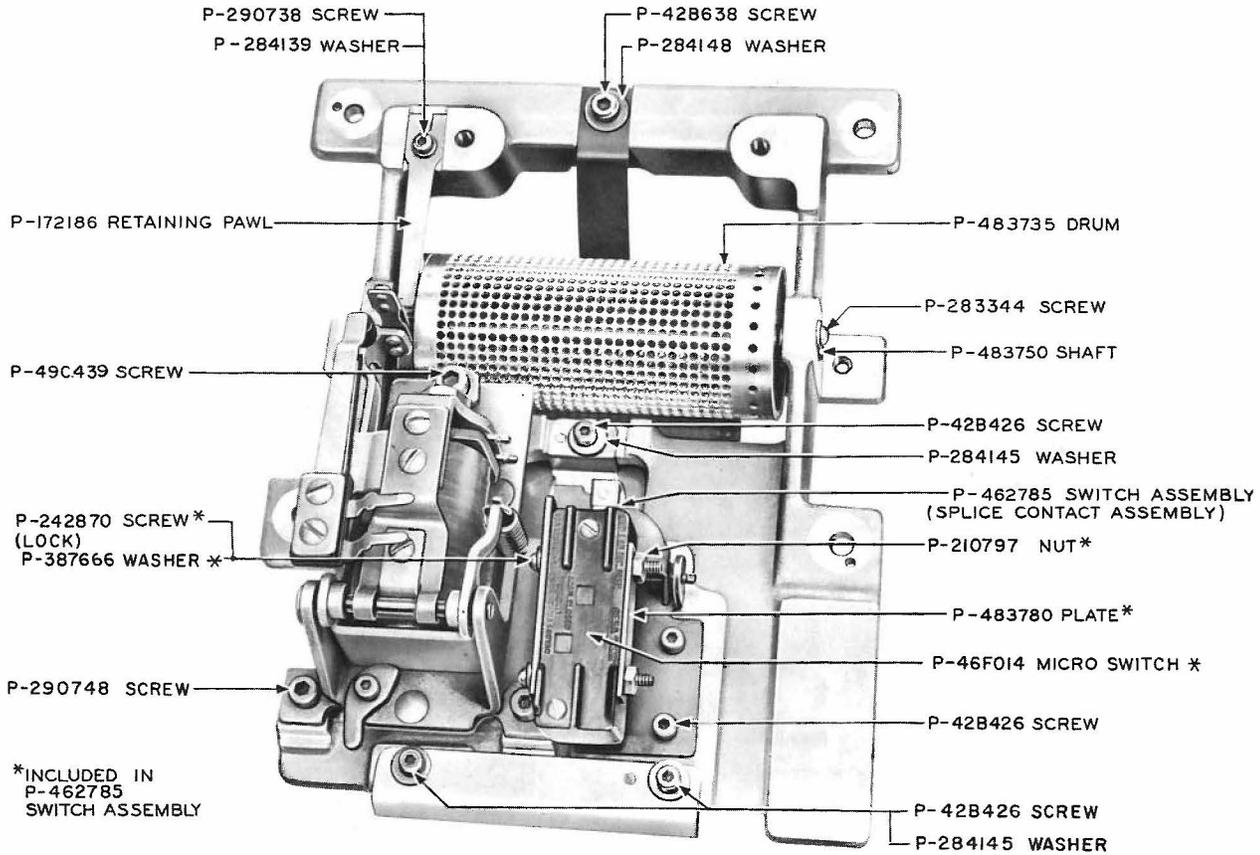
Cradle Assembly — Bottom View (KS-13882 L1, L2, and L3 perforators)
